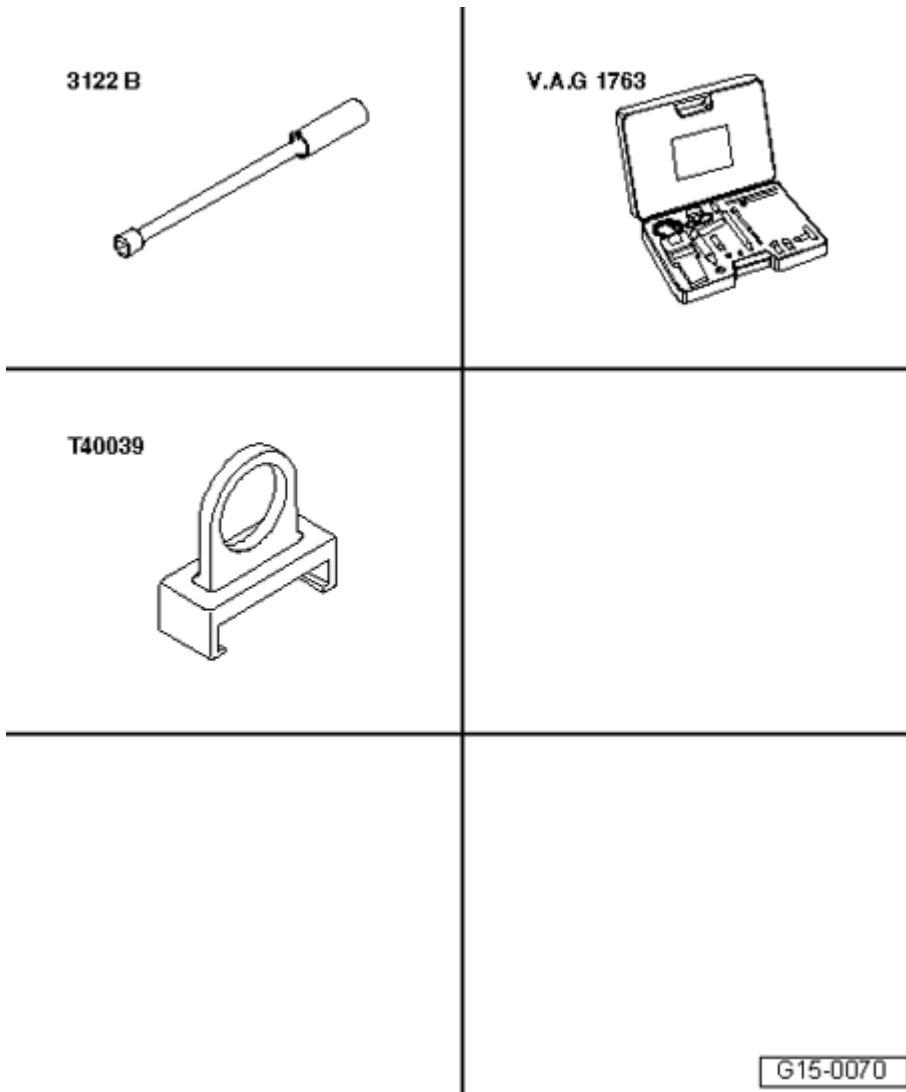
Identifying Special Tools - Compression Pressure, Measuring
